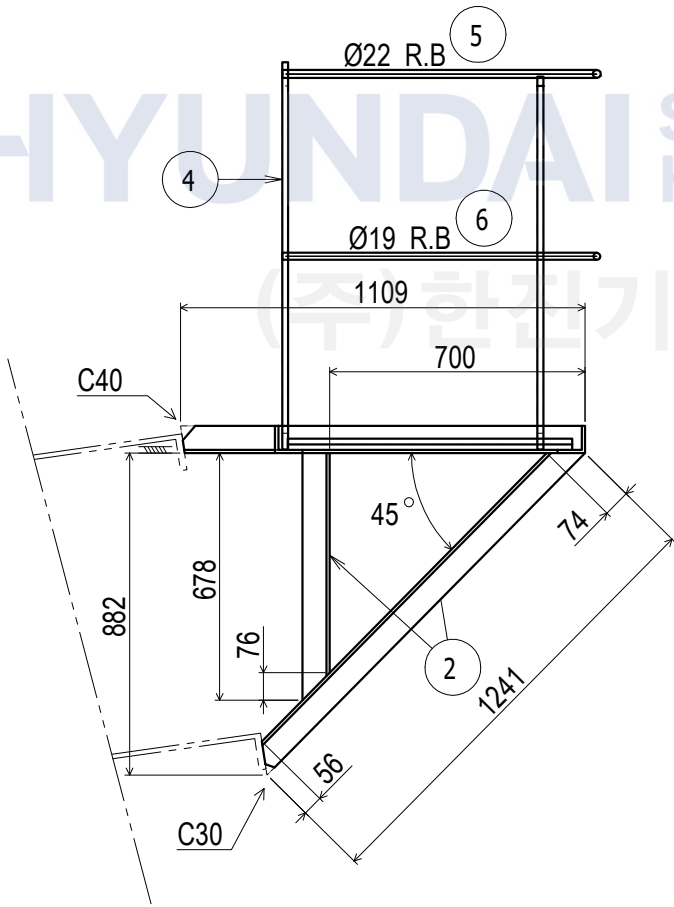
DETAIL OF PLATFORM			SHIP NO.		8140,8198/8199		11
